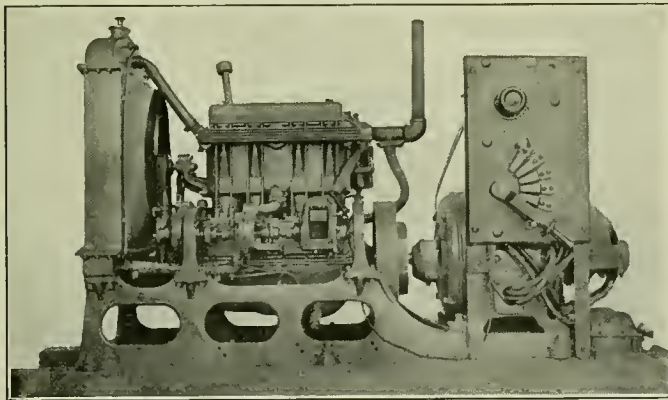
General Electric Arc Welding Generator for Intermittent Duty Driven by 20-Hp., Four-Cylinder Gasoline Engine
